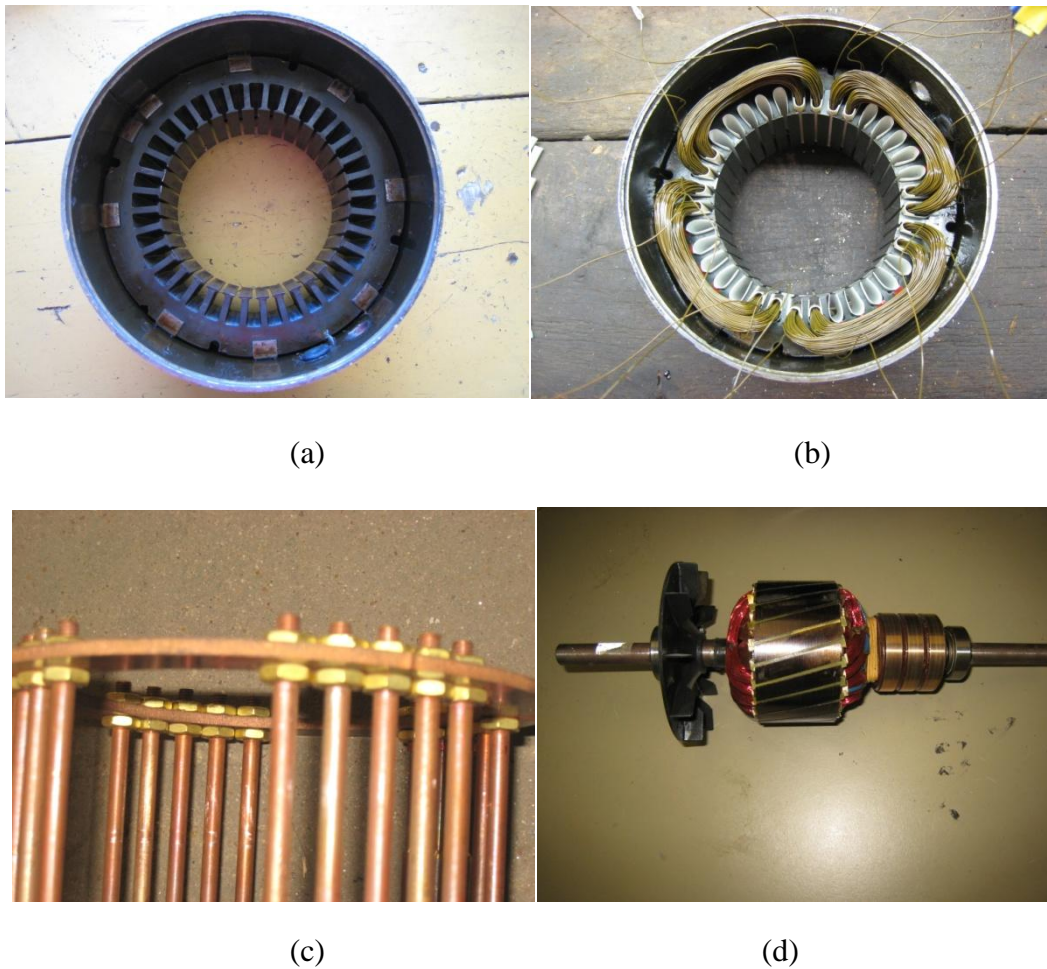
Different parts of IOSM. (a) stator of the original doubly fed IM with its winding removed, (b) new field winding on the stator, (c) damper cage with the removable end ring for broken bar experiment, (d) original rotor windings used as the armature windings of the IOSM.
